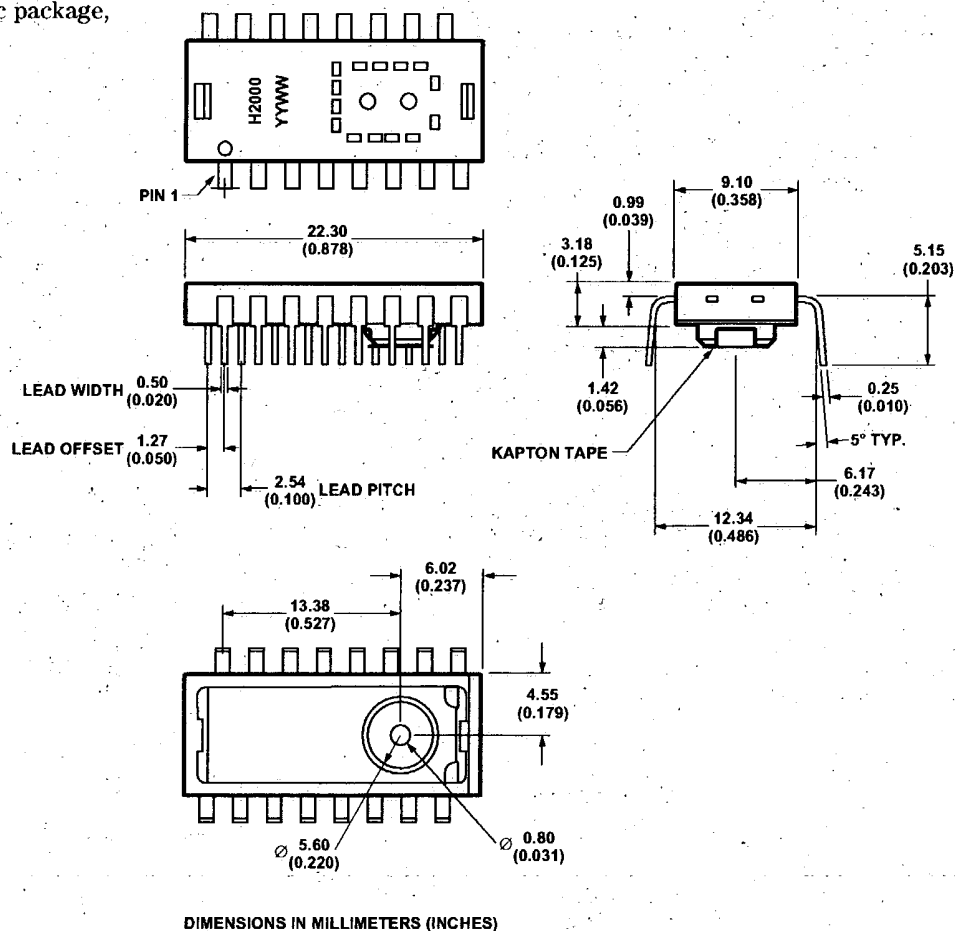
HDNS-2000 Sensor Package Outline Drawing.
